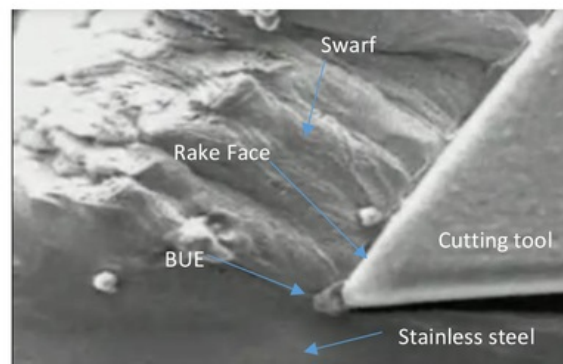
Actual photo of Stainless steel being machined, and formation of a BUE is identified [6].
